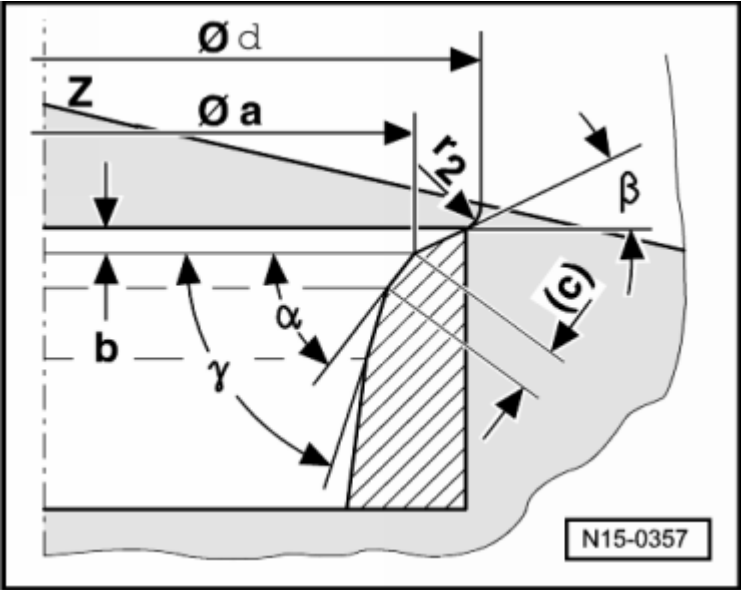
Identifying Angles And Dimensions To Rework Exhaust Valve Seat
